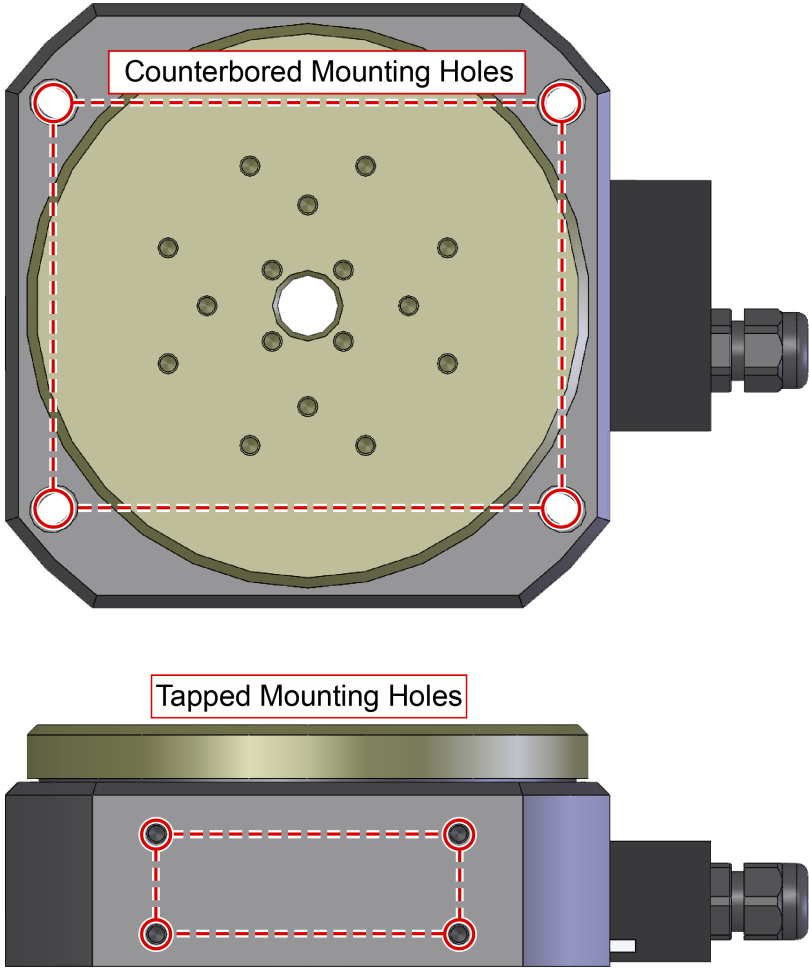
ADRS Stage Standard Mounting Hole Locations
